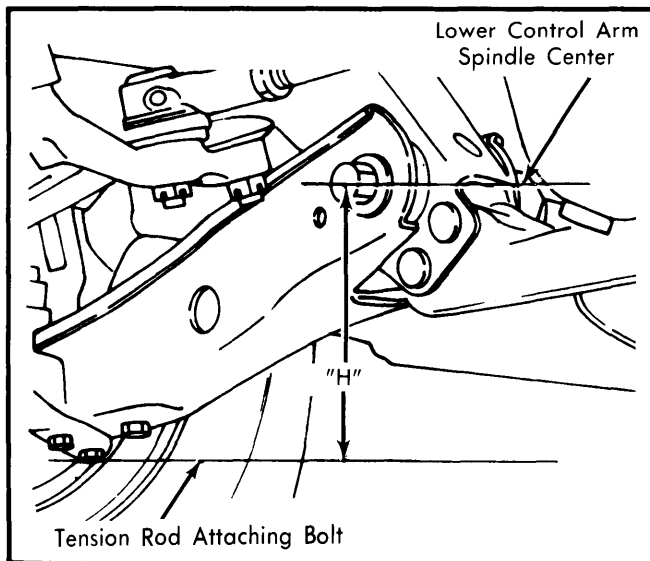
View Showing Dimension "H" (Unladen Vehicle)
